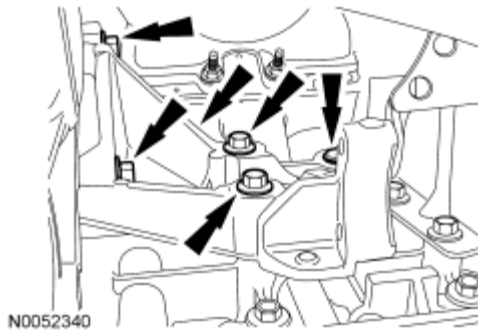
Locating Power Transfer Unit (PTU) Support Bracket & Bolts
